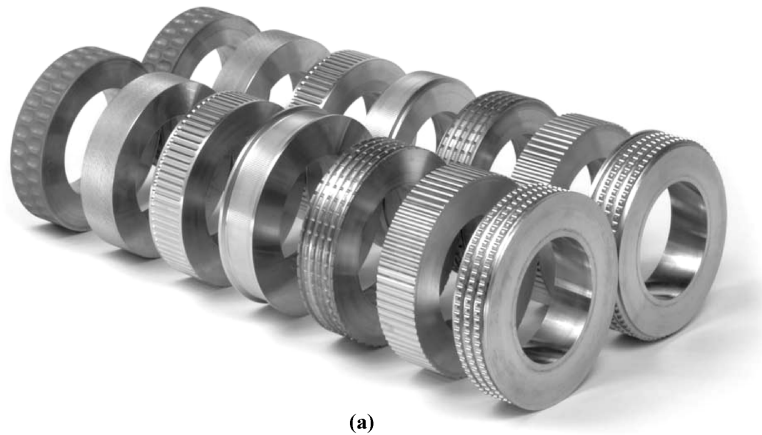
Expanded view of a roller compactor showing the components. (Courtesy: The Fitzpatrick Co.)
